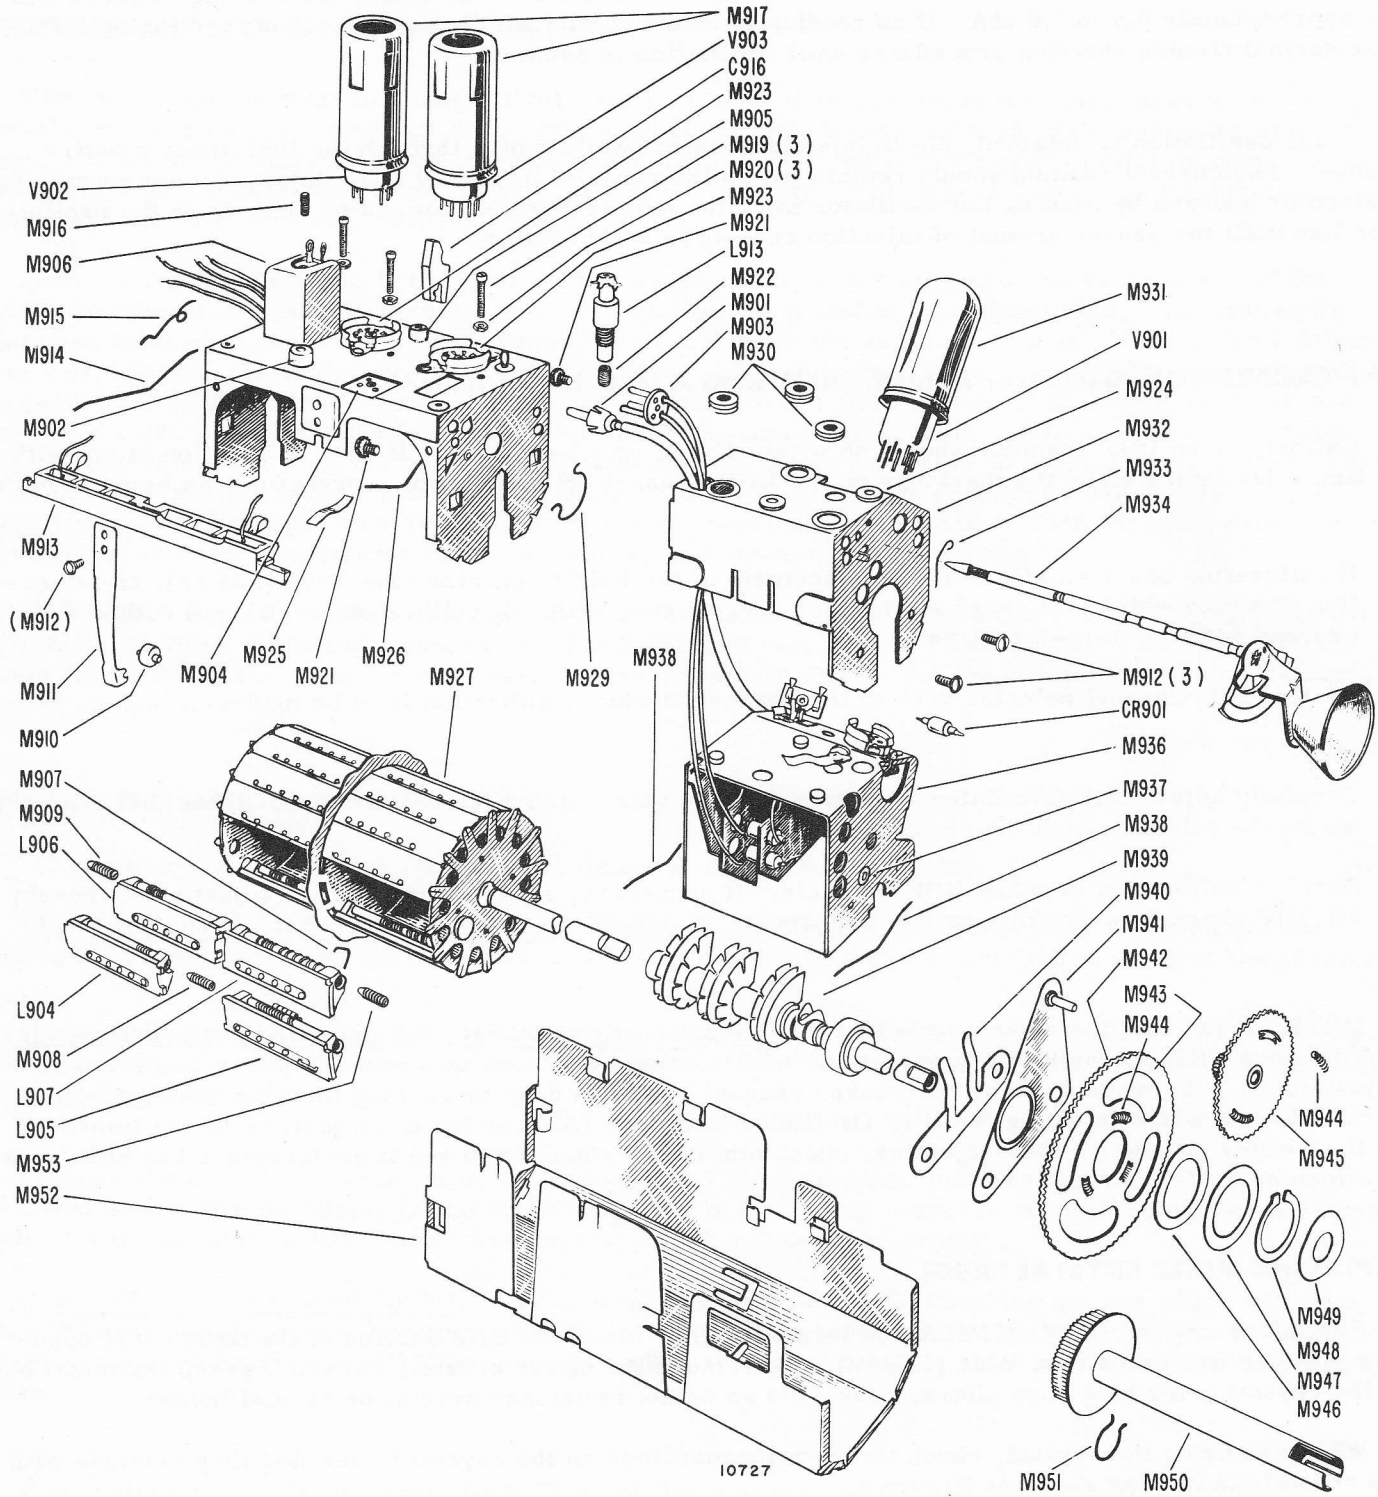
Exploded View of VHF-UHF Tuner 94E107-1.
